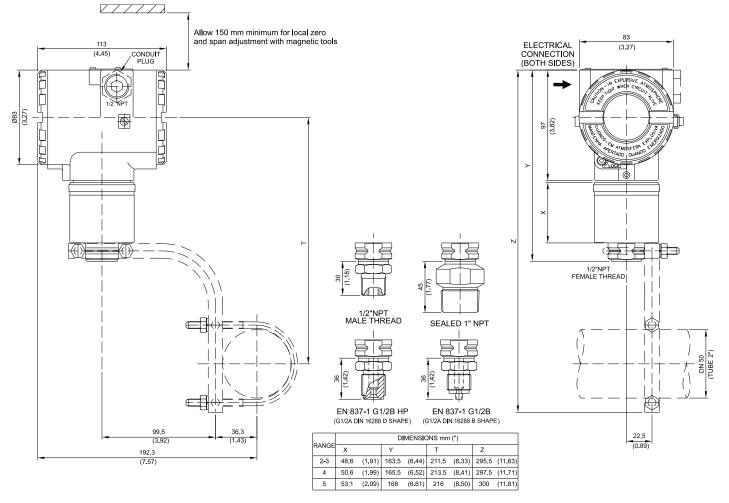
(a) - Dimensional Drawing and Mounting Position for LD292
